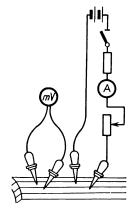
Circuit 'arrangement for checking the condition of soldered joints at commutator risers and turn-to-turn fault in windings
